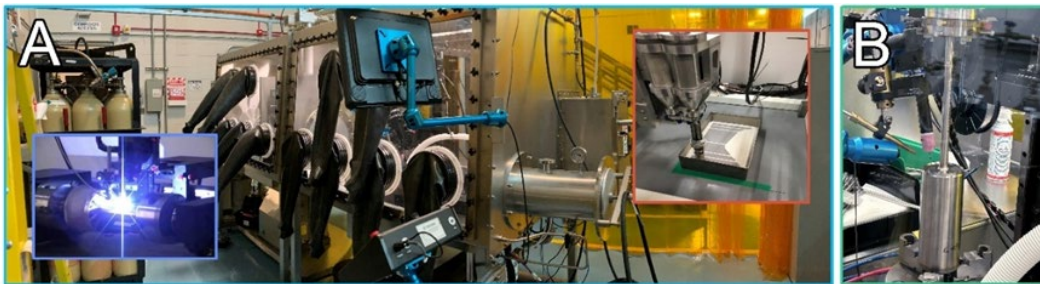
Glovebox in which the powder is packed (A) and the HIP can vessels are welded (B)
